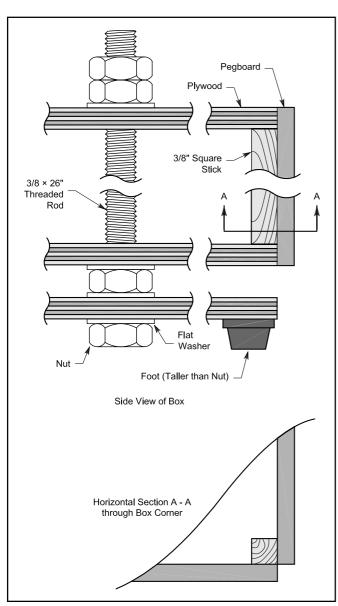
A mechanical drawing of the rotatable pegboard storage assembly.
